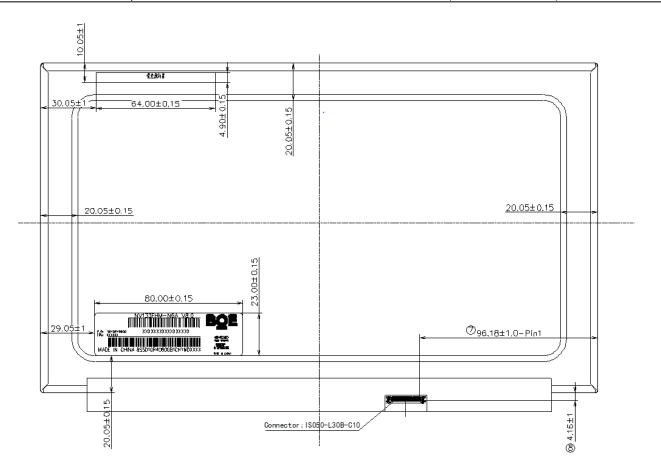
TFT-LCD Module Outline Dimensions (Rear view)
